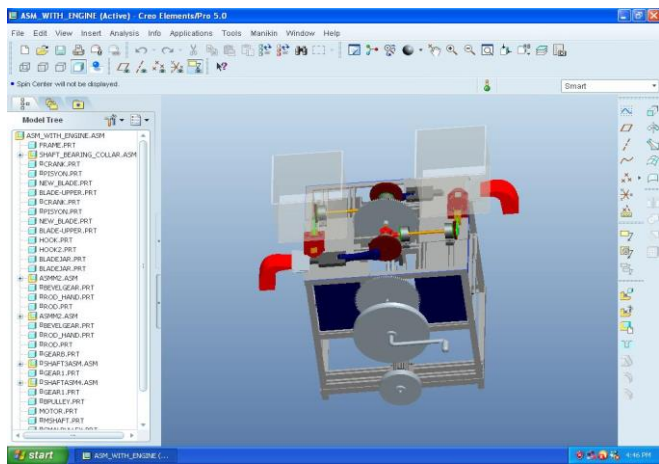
Part Assembly of Marking Nut Dehuller Machine
